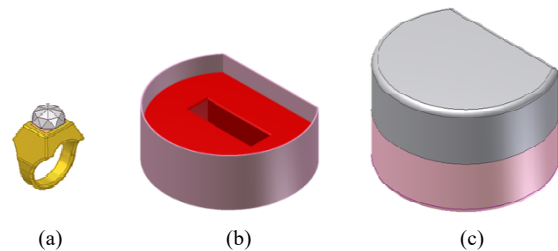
(a) Jewelry model; (b) Jewelry box pad; (c) Jewelry box assembly model
